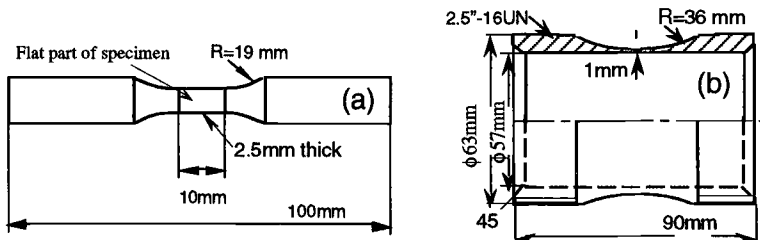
(a) Uniaxial plate specimen, and (b) biaxial tubular specimen.
